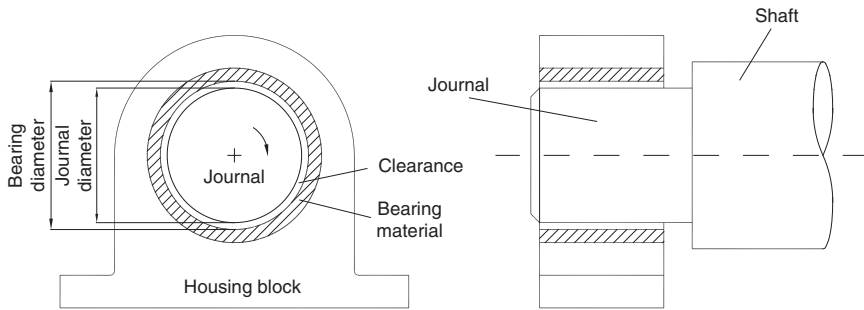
A plain surface, sliding, or journal bearing.
